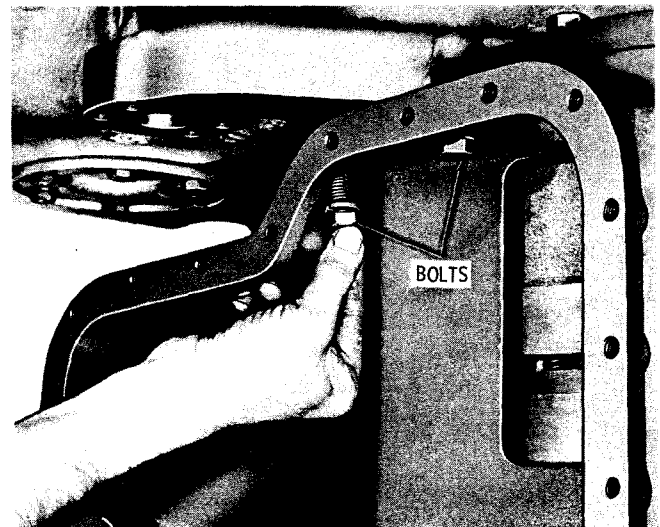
Installing converter housing bolts at bottom of transmission (CT, CLT, VCLT) S1716
